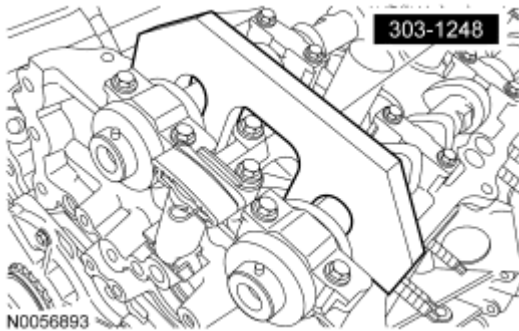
Removing Special Tool (303-1248) From LH Camshafts
